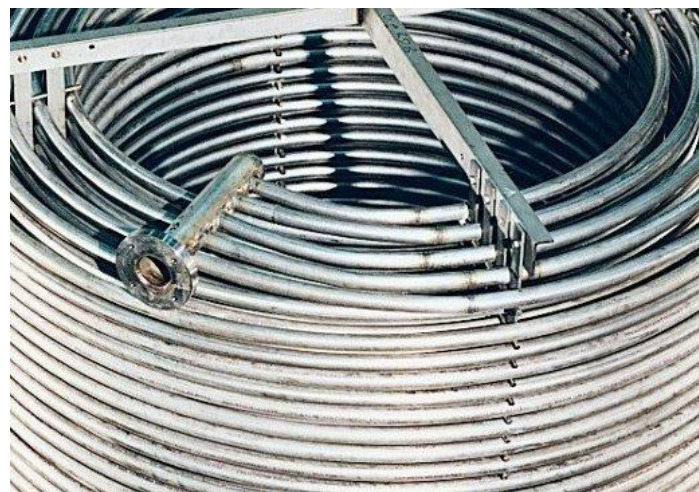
Helical coiled tube bundle [https://www.graham-hart.com/products_coil_heat_exchangers.php]
